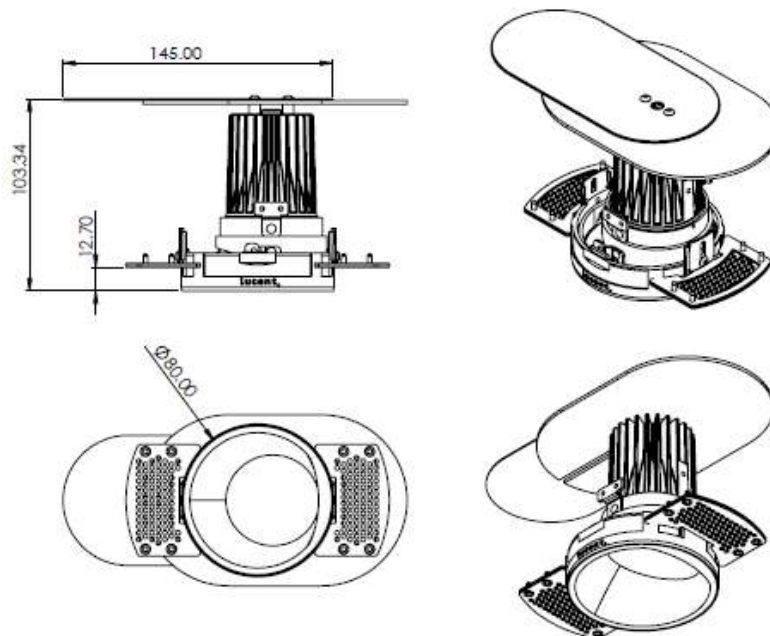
Details of Specimen 'D' Downlight (Plus Mini Wallwash Trimless)
